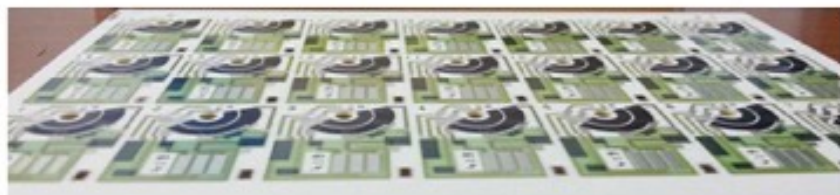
and 4 - Examples of ceramic PCBs with embedded components
